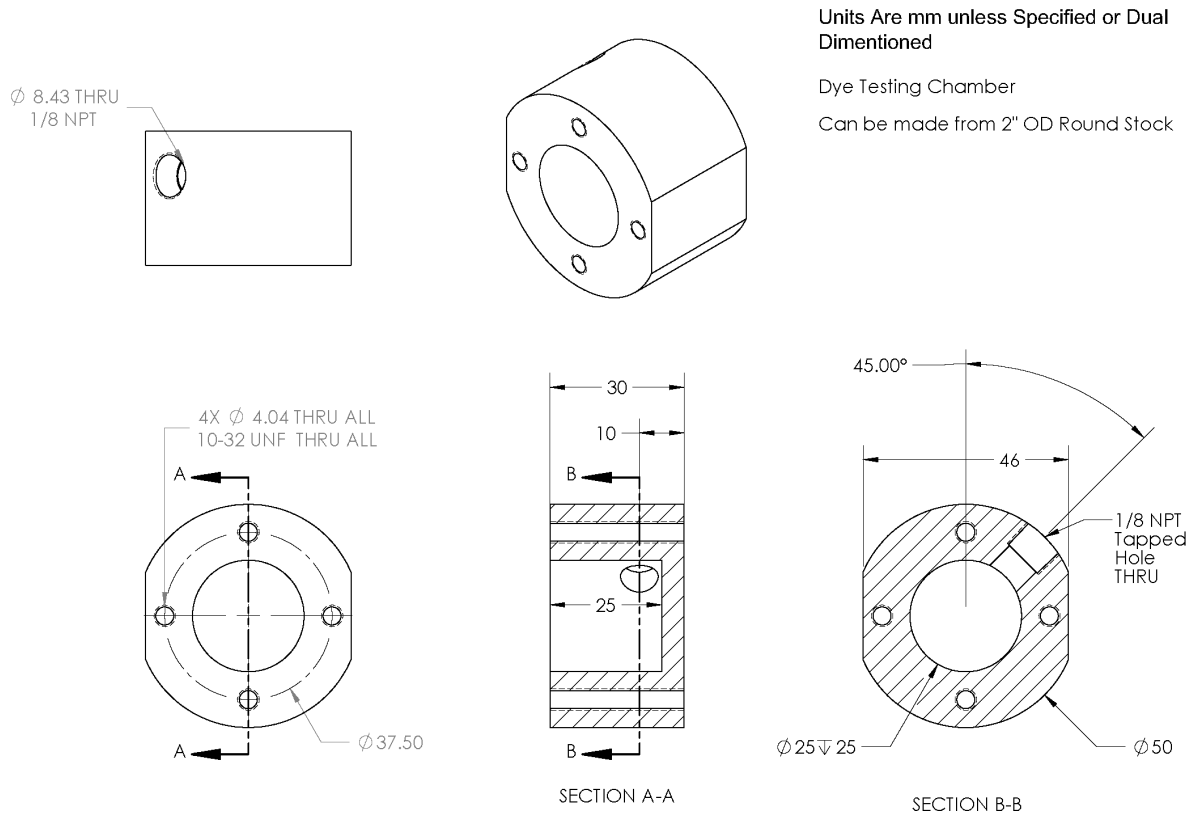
CAD Drawing of the Modified Dye Testing Cell to be Used in the Partial Puncture and Dye Testing.
